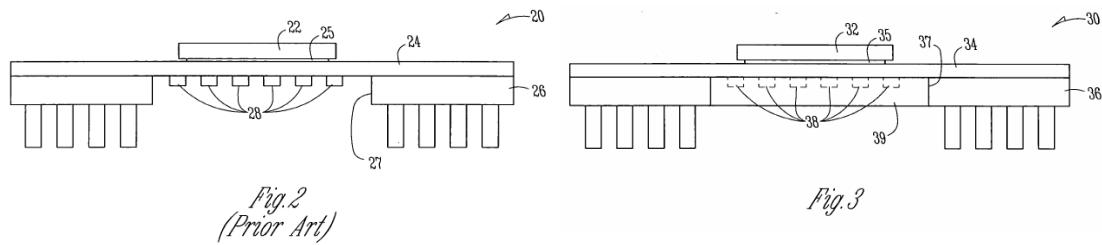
shows the prior art electronics package; Fig. 3 shows an electronics package produced by a method of the claimed invention. The cavity is labeled “27”; the encapsulant is shown as “39.”
